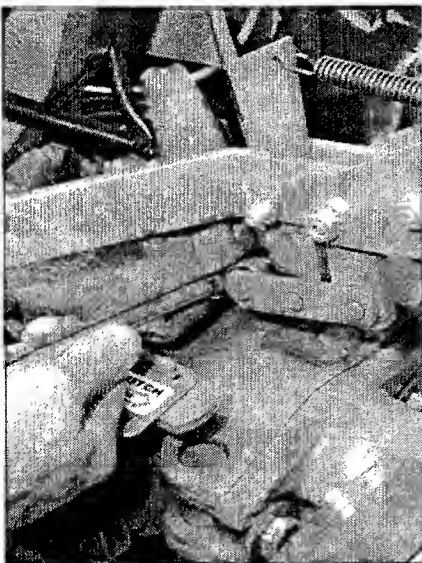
Insert slotted end of belt adjustment tool between roller and bracket, with the flat side of the slotted end facing the roller.
